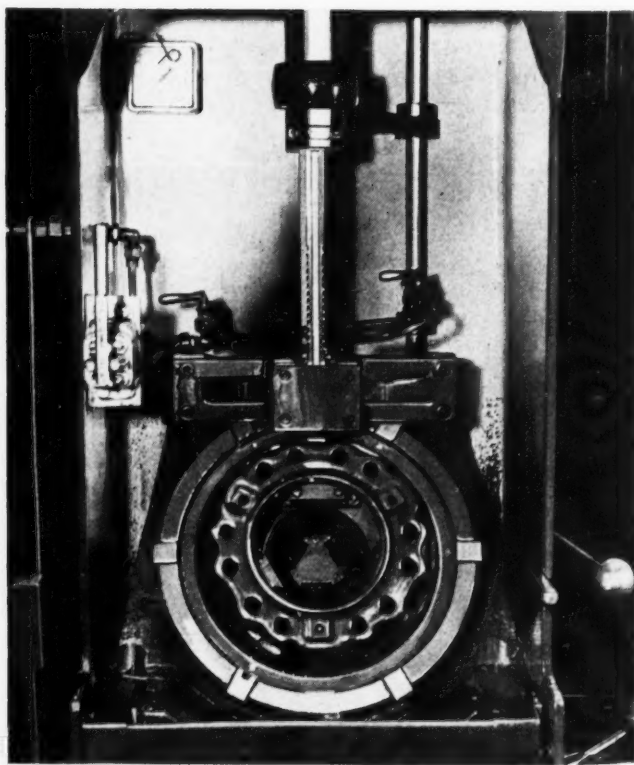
Three Square Holes are Accurately Finished in Clutch-cover Stampings by a Single Broach and a Hand-indexed Fixture
